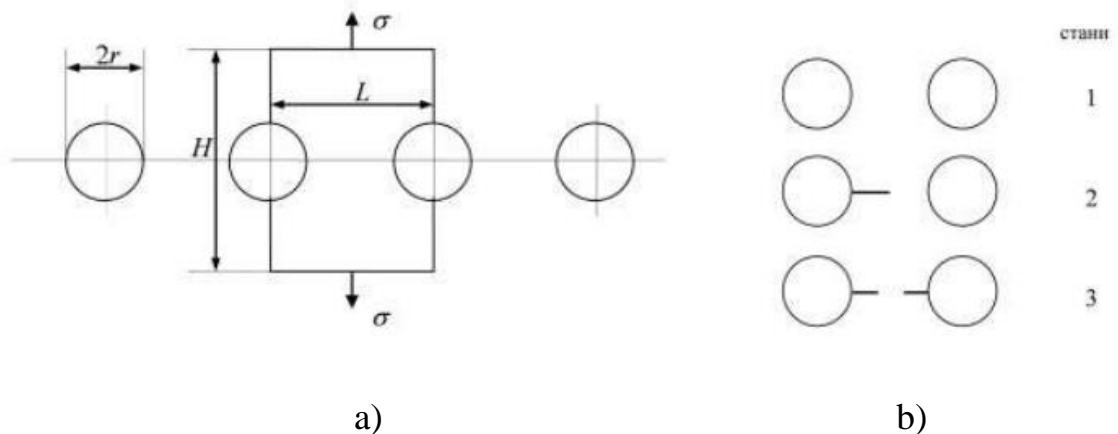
Scheme of the riveted joints element between adjacent holes for rivets (a) and indication of possible states of damage of such element (b);
